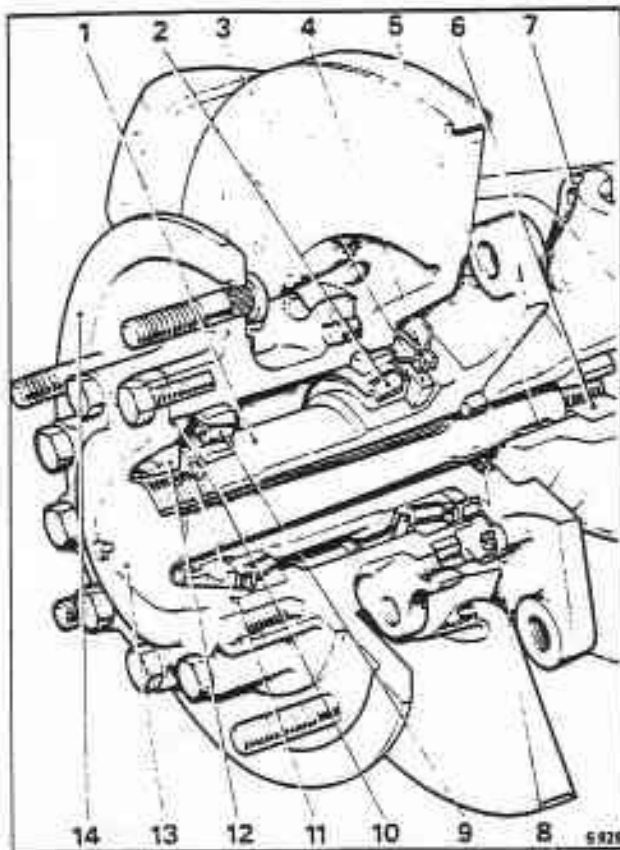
Rear hub (cars fitted with ball and trunnion joints)
